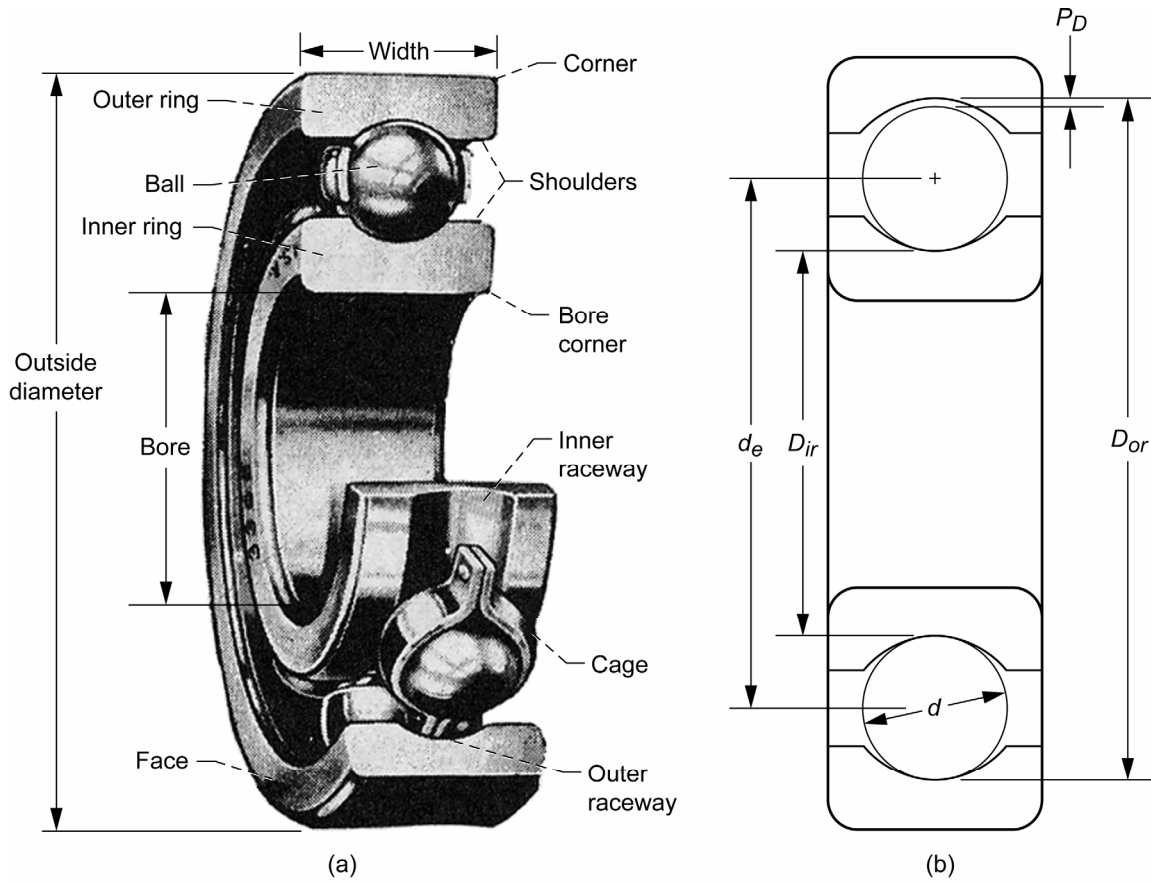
Deep-groove ball bearing. (a) Schematic. (b) Cross section without cage.
